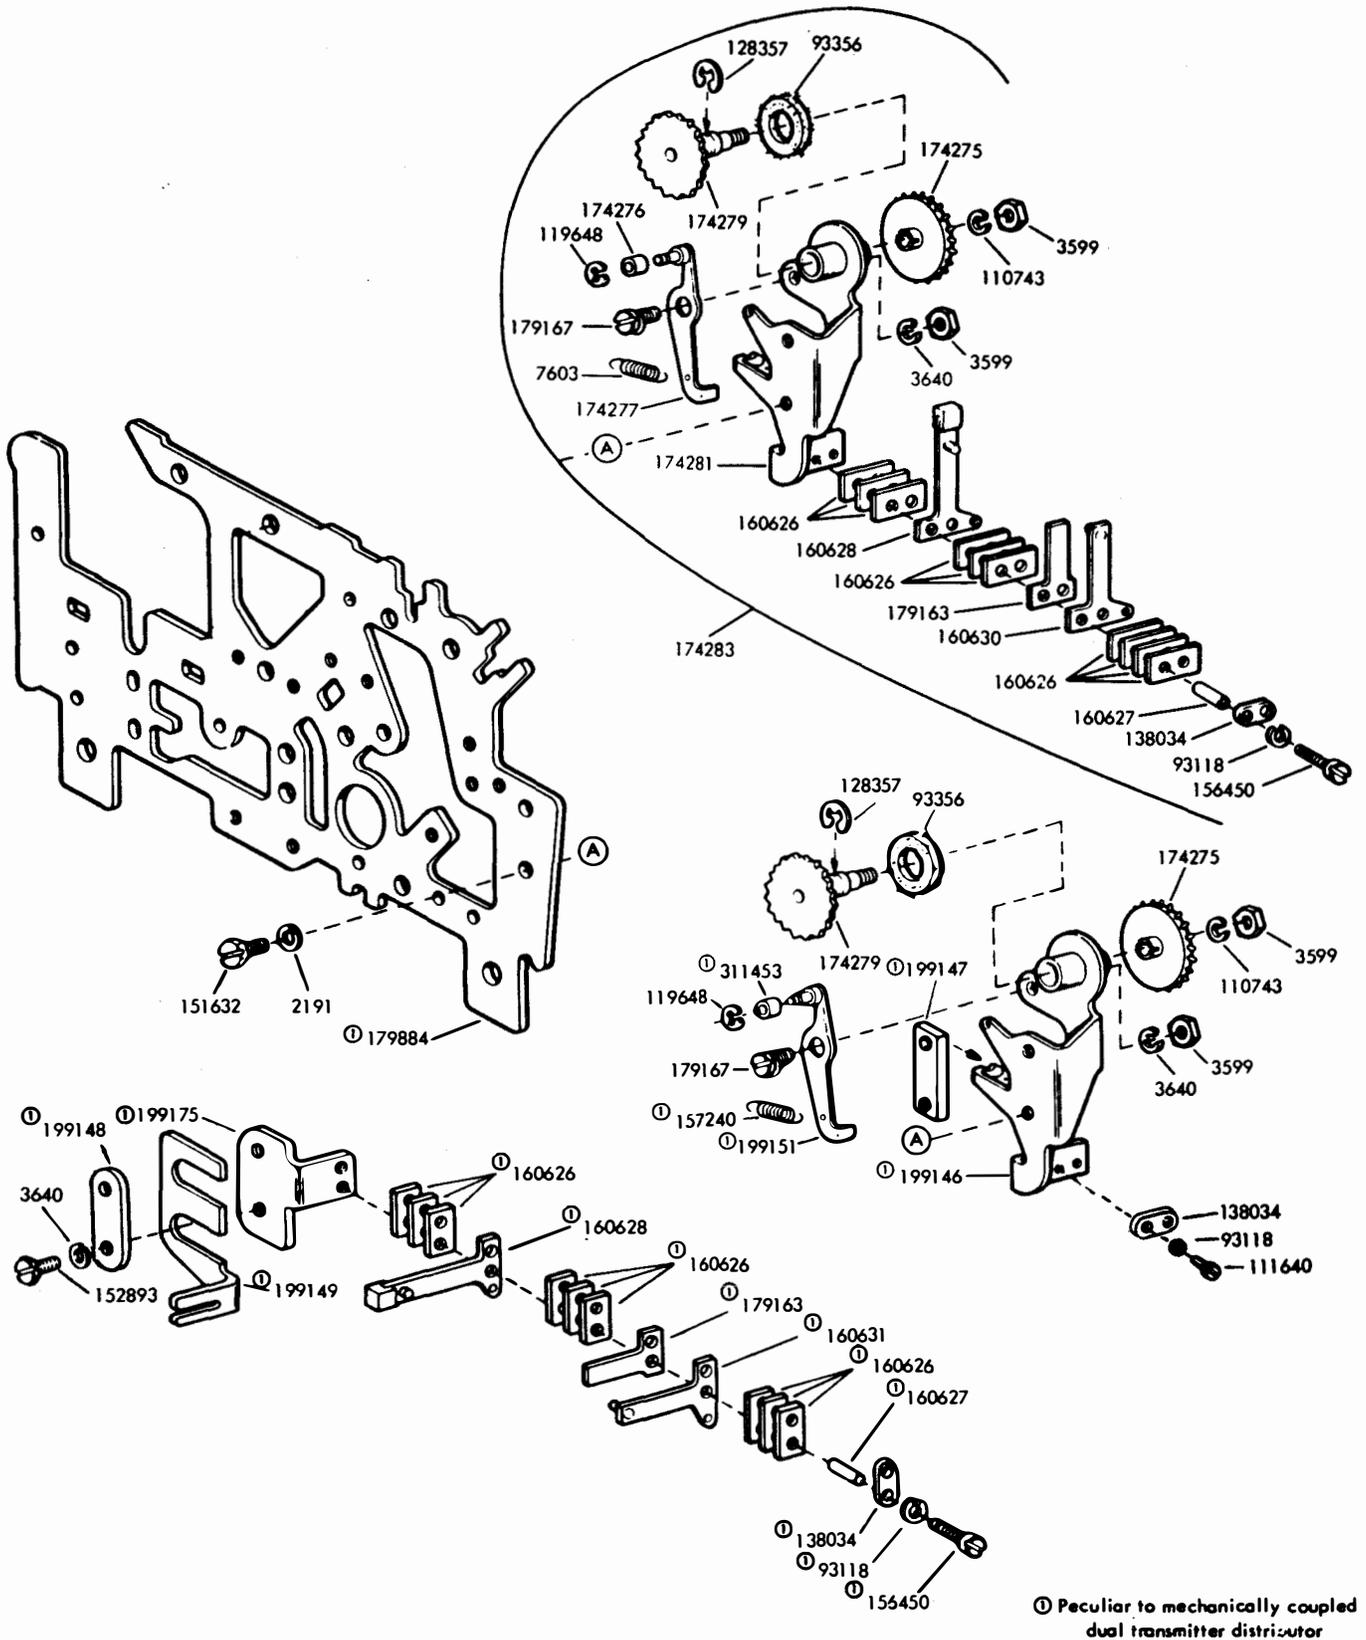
Front Plate Mechanism (With Tape Feed Assurance Contact)
